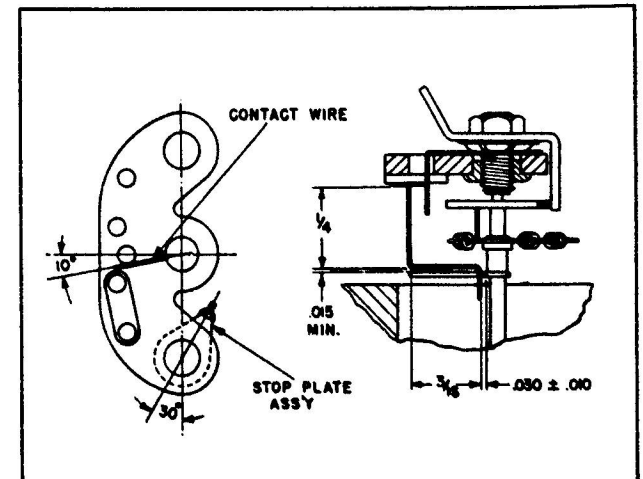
Position of Stationary Contact Wire and Stop Plate Assembly
